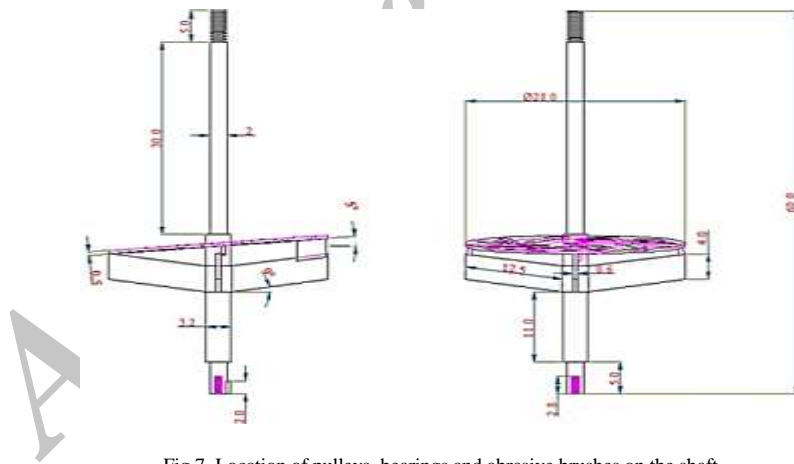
Location of pulleys, bearings and abrasive brushes on the shaft
